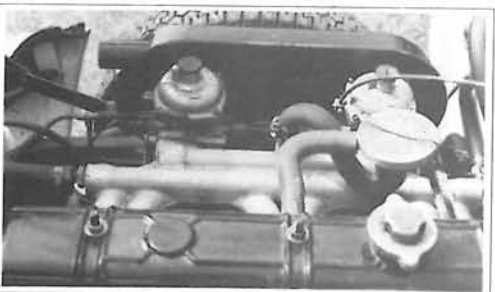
With the crankcase breather valve fitted to 2-Litre Mk.1 inlet manifolds the rocker cover incorporated a breather pipe outlet and a sealed oil filler cap.
